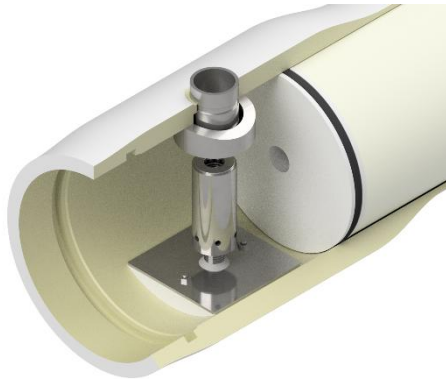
Hold the mounting package with the hand by the bottom to prevent the guiding tool from separating.
